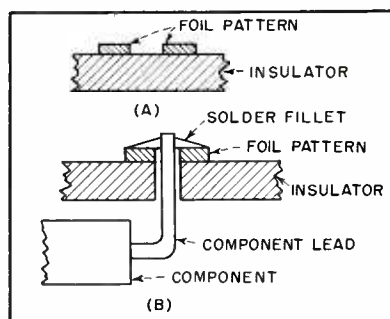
Magnified cross-section of foil pattern on insulating card (A) and method of dip-soldering to avoid strain on the foil (B)
